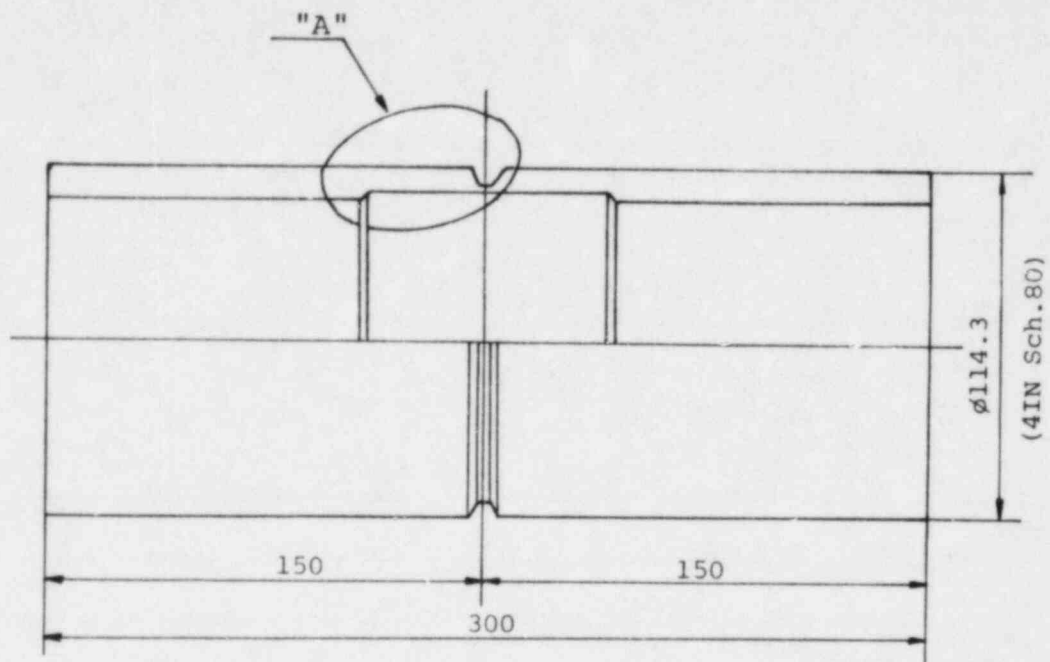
CONFIGURATION OF WELD PREPARATION
